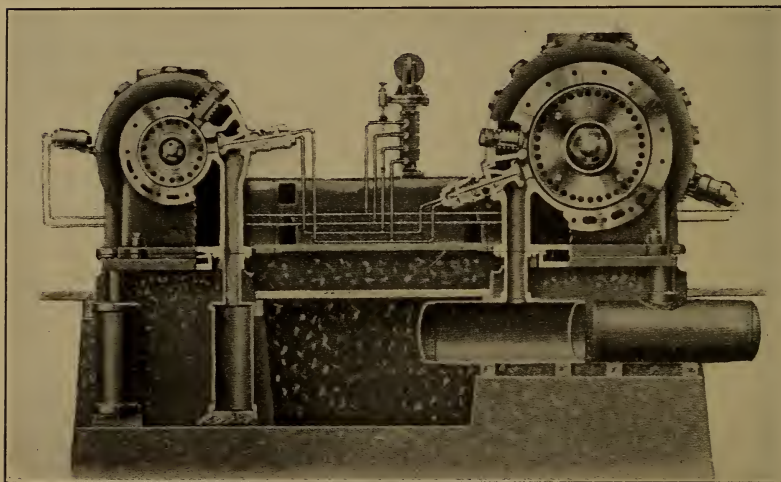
Section of Two-stage Compressor with Clearance Controller.
